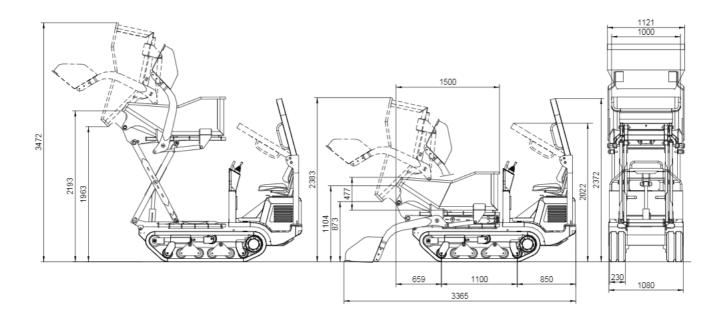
Machine dimensions (model DT15 with high-tip skip)
